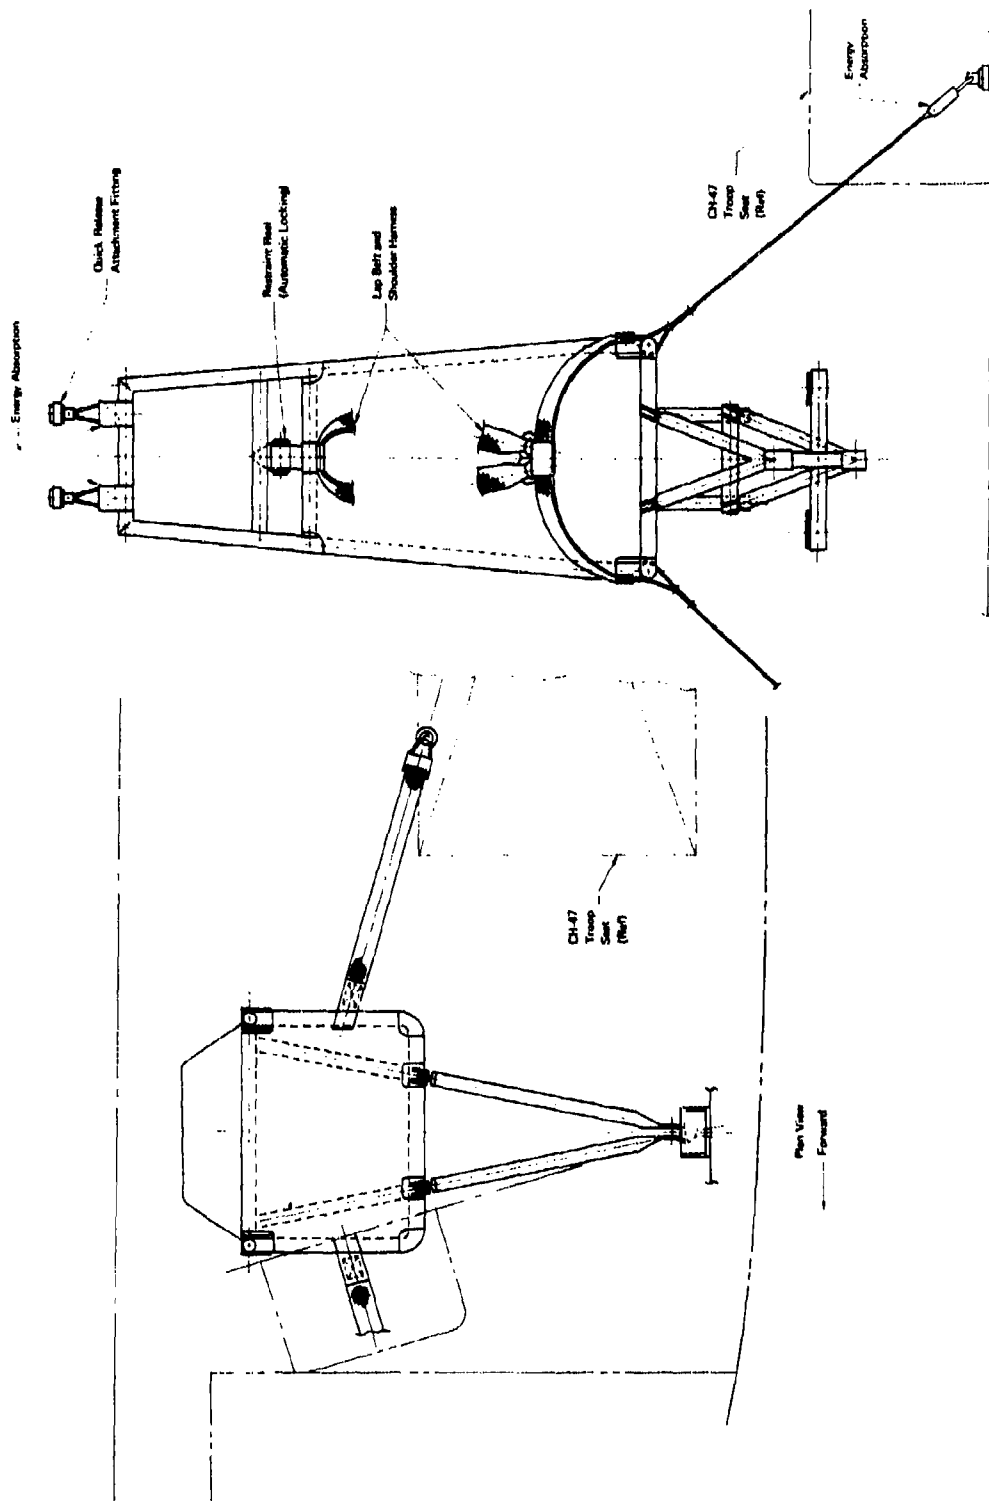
Concept D - Ceiling- and Wall-Mounted Fixed Unarmored Gunner's Seat (Sheet 2 of 2).
